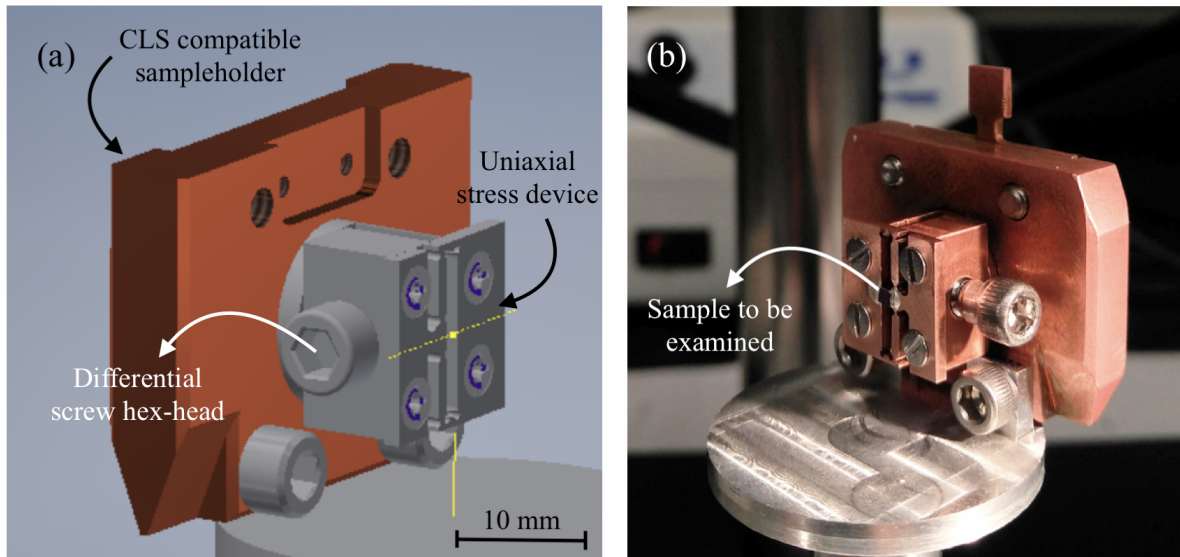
Uniaxial stress device: Design and reality, (a) AutoCAD design of the uniaxial stress device, (b) Machined product with a test sample on with mounting-epoxy scheme (a) (discussed ahead).
